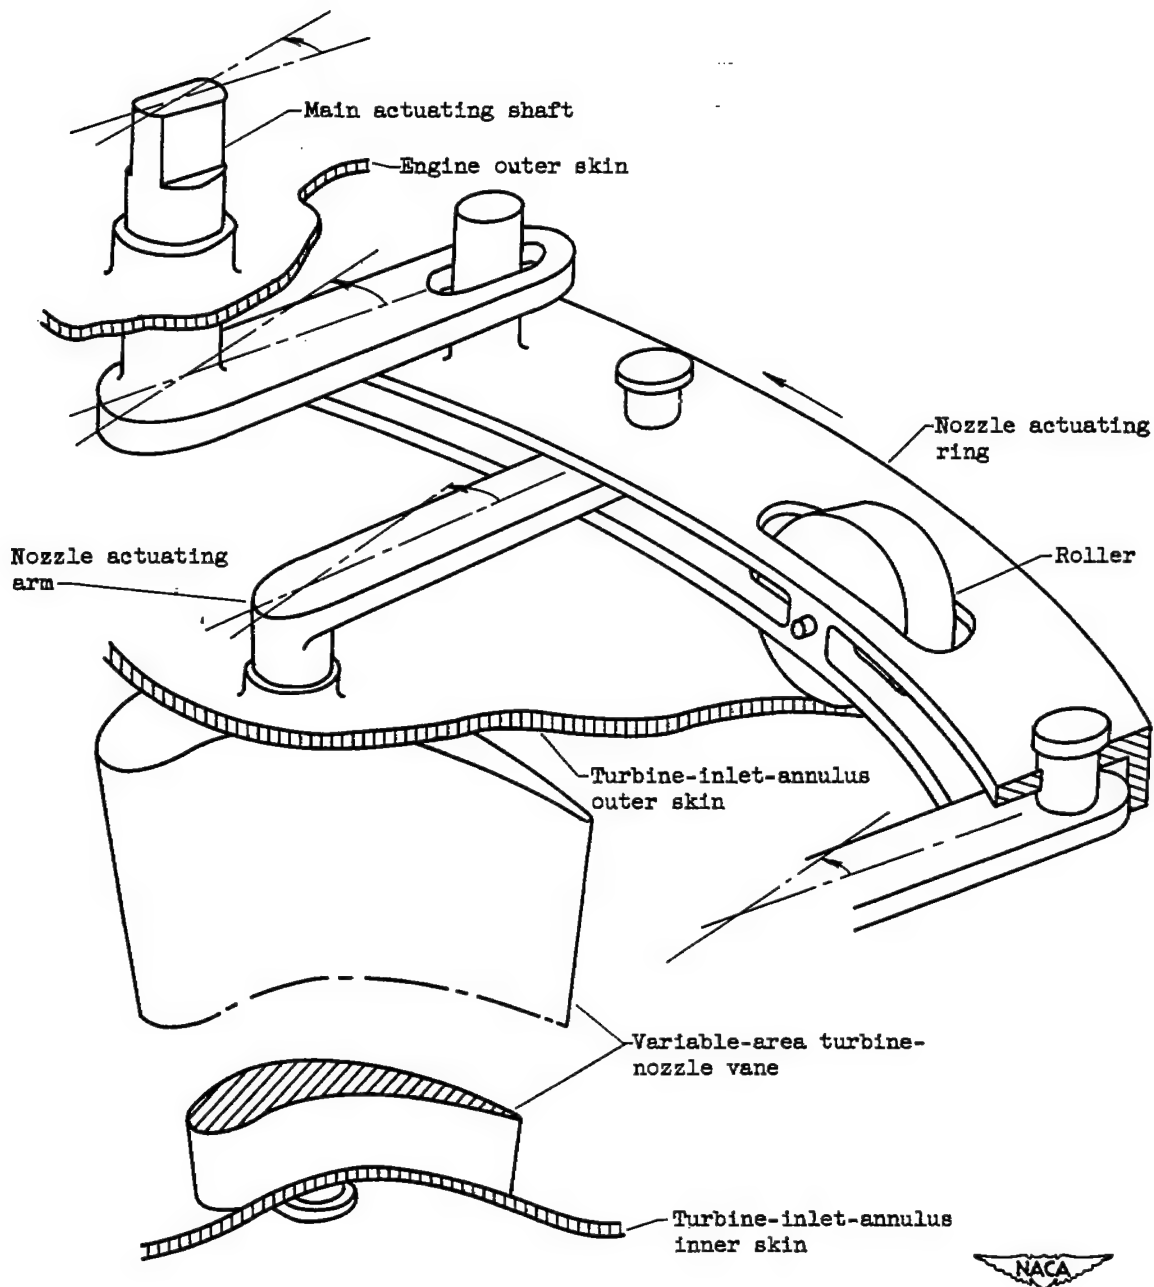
Schematic sketch of variable-area turbine-nozzle actuating mechanism.
